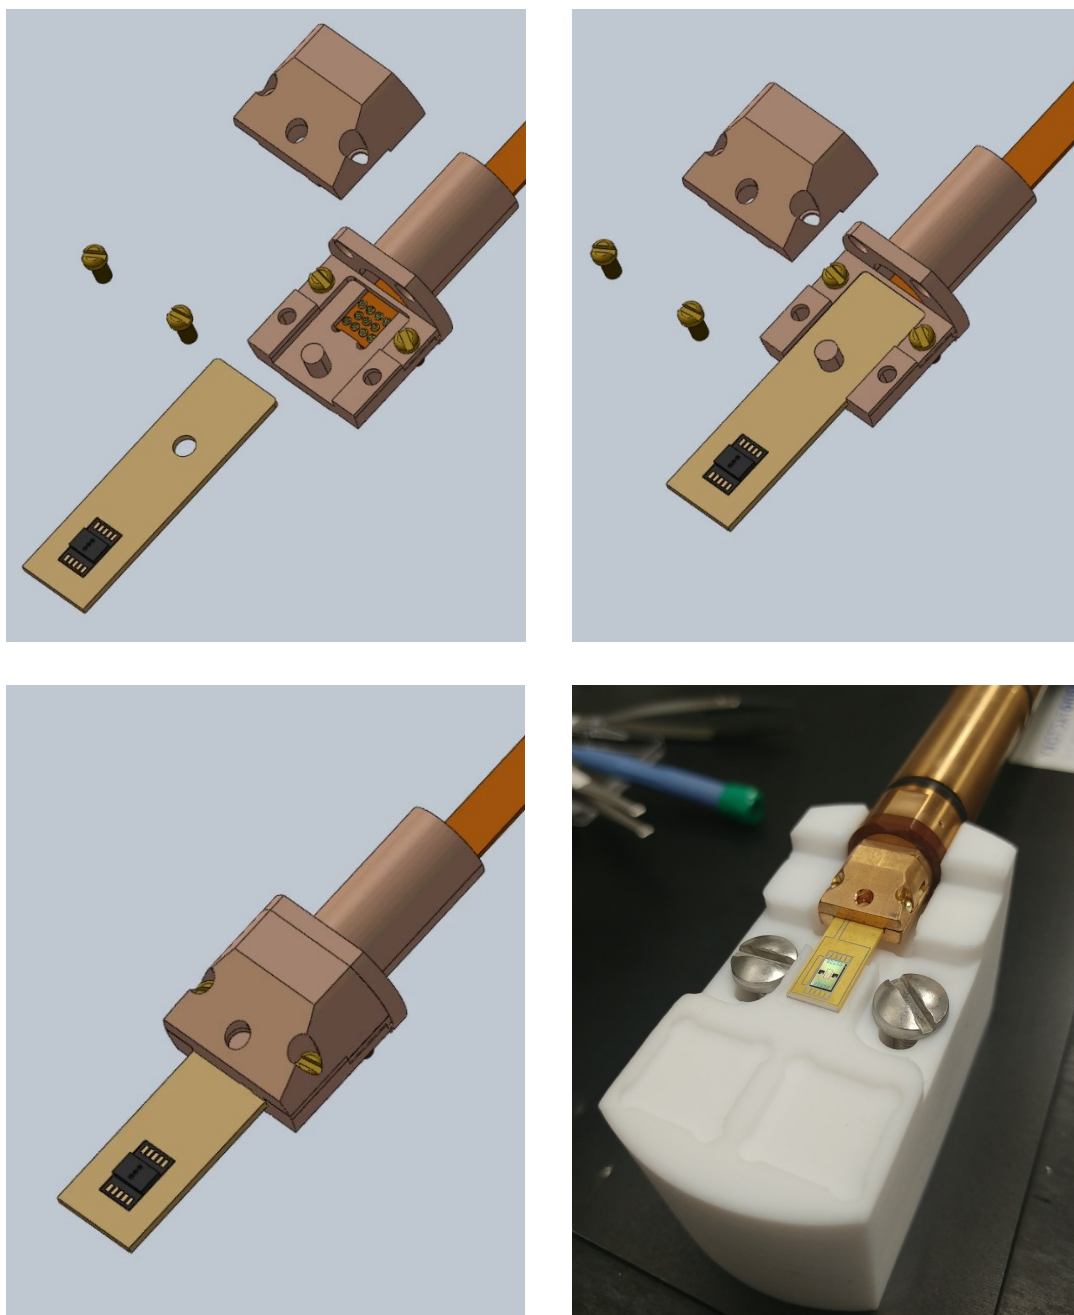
Front (nose) of custom EC liquid cell holder. CAD parts illustrate how chip carrier is secured into holder after the liquid cell has been glued and soldered. Bottom right figure shows actual holder with chip carrier.
